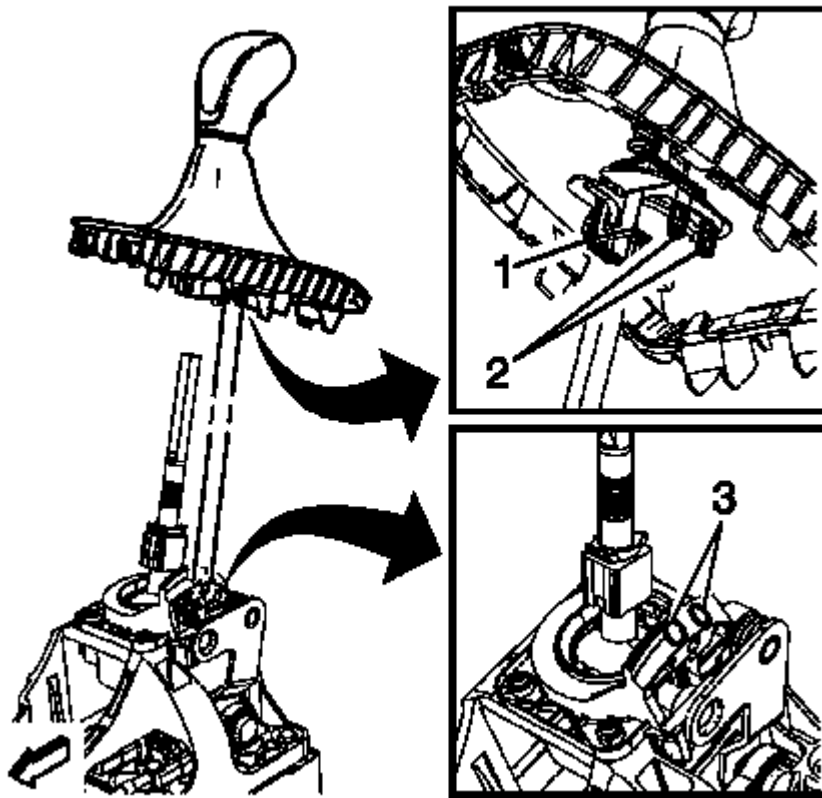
Reverse Blocker Assembly, Pins & Holes
